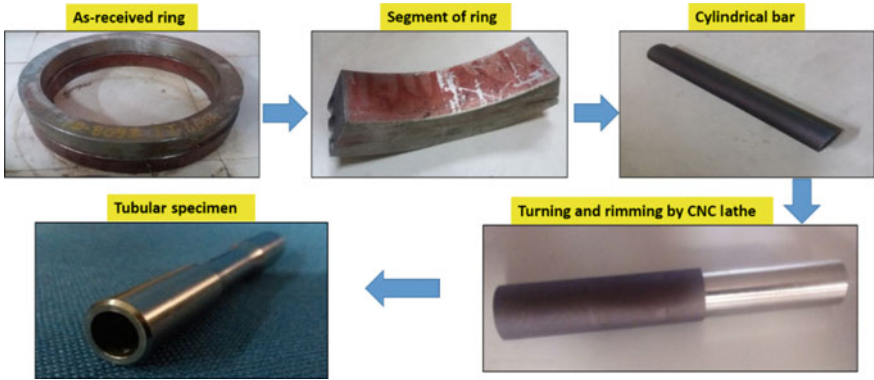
Specimen preparation technique for thin-walled tubular specimen
